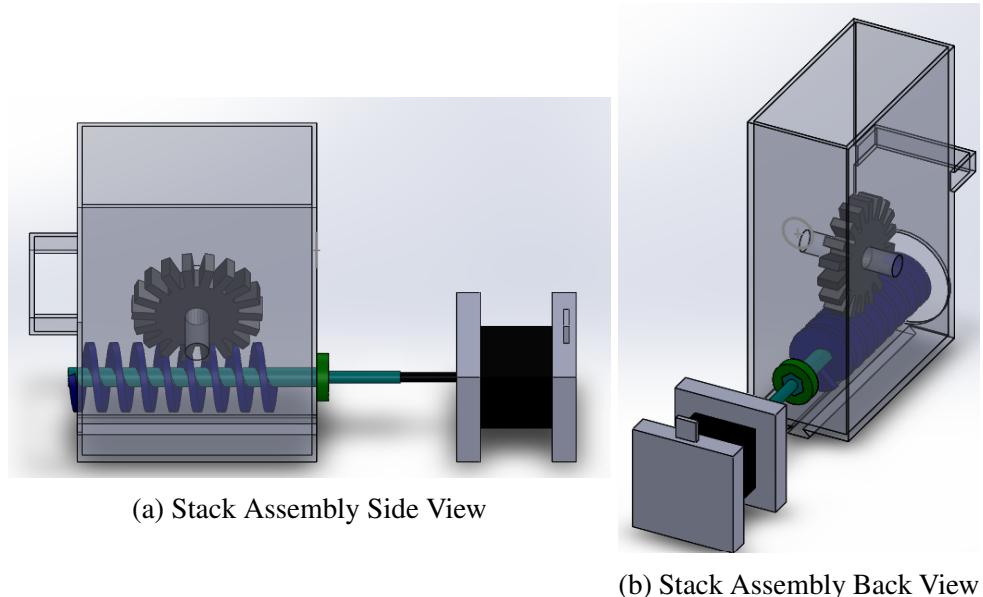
Stack Assembly Made Using SolidWorks 2022
